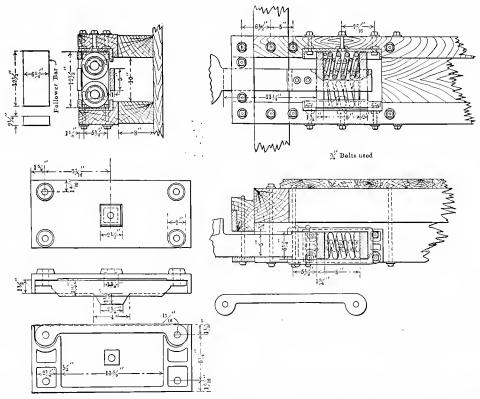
Hinson Twin Spring Draft Gear for Freight Cars with Wooden Center Sills. National Car Coupler Company.
